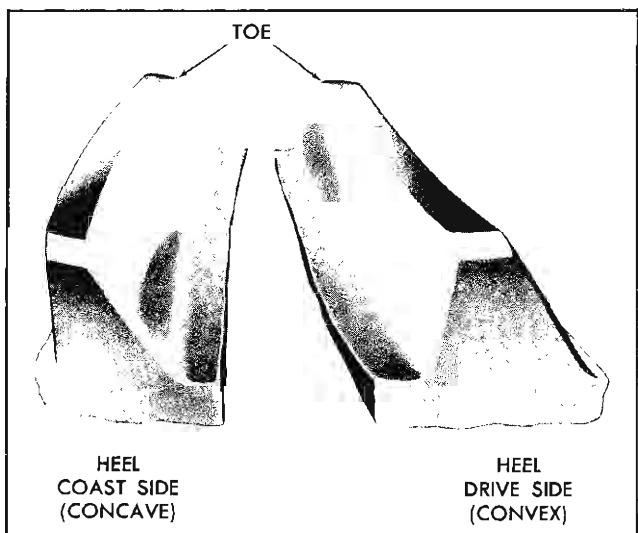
Tooth Pattern—Pinion Too Close to Ring Gear
